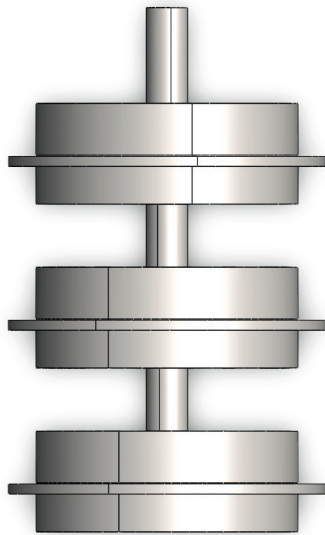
Assembly of the investment-cast wheel component in SOLIDWORKS
